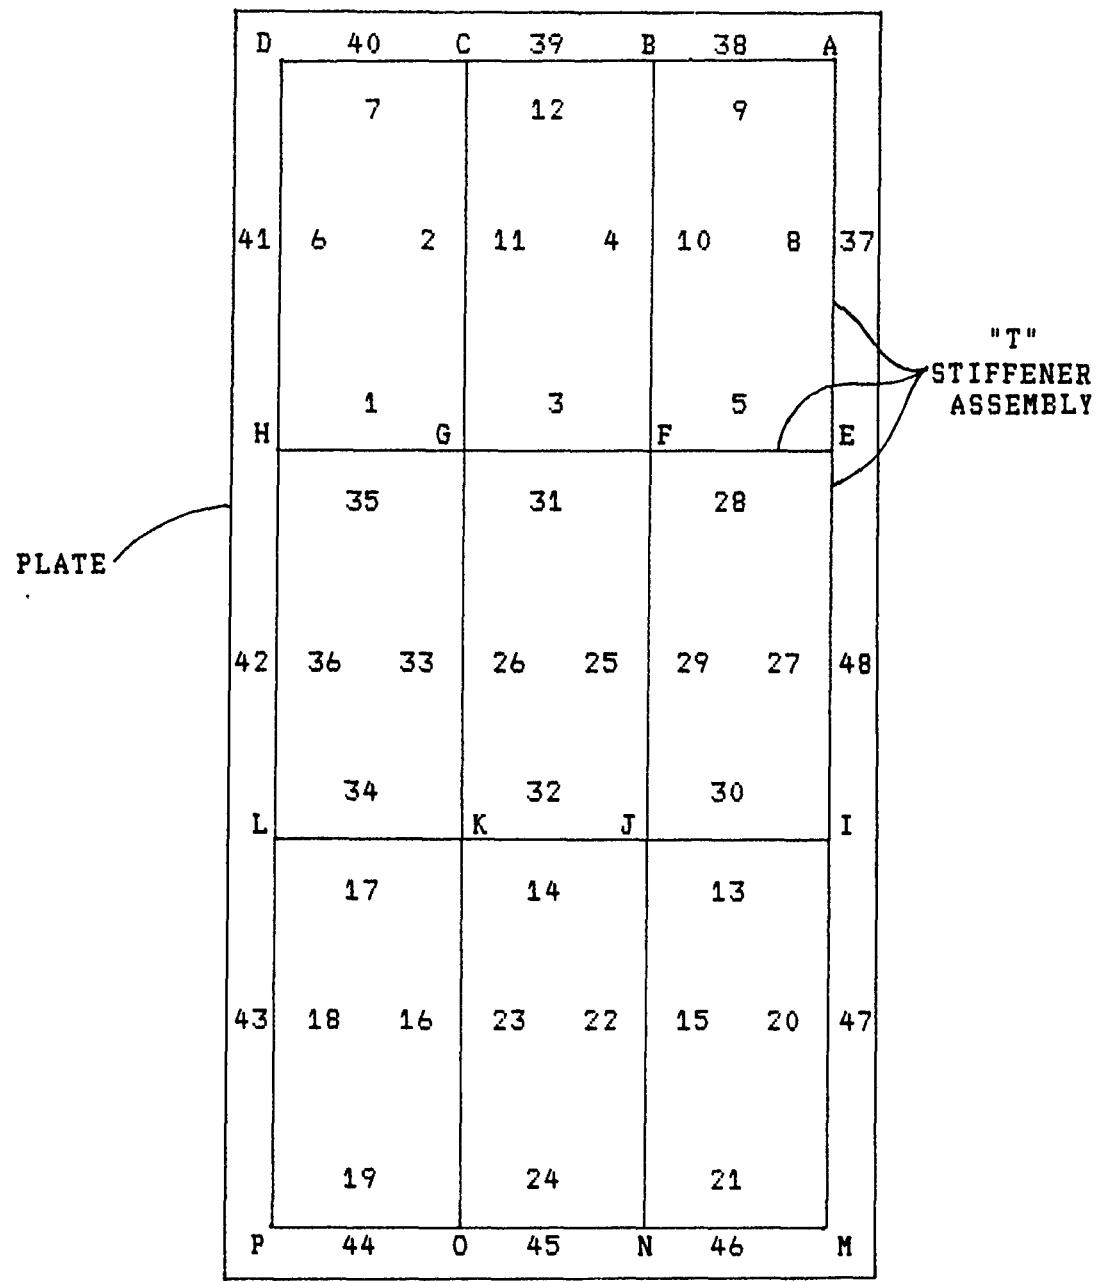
WELDING SEQUENCE USED TO WELD 3/16" "T" STIFFENER ASSEMBLY TO 3/16" PLATE
